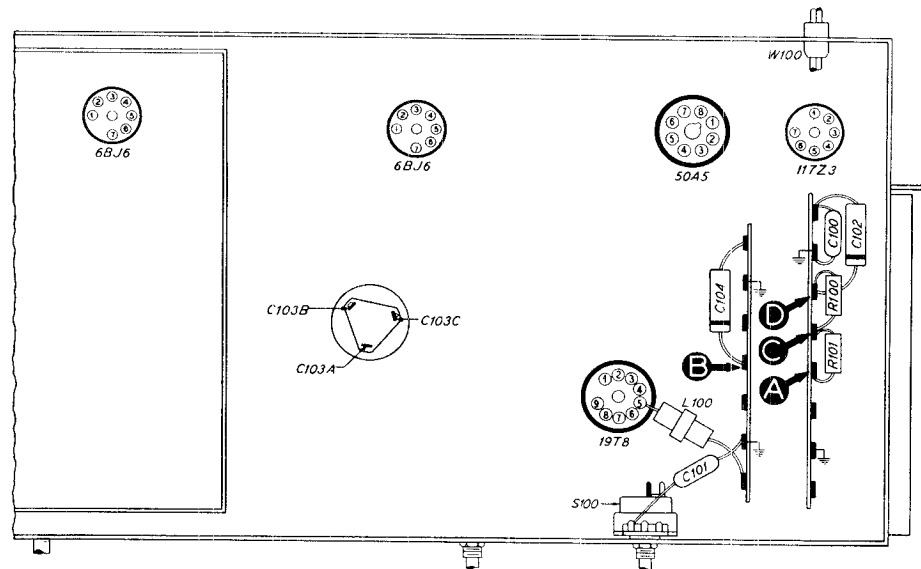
Bottom View, Showing Section 1 Test Points TP-5398A
